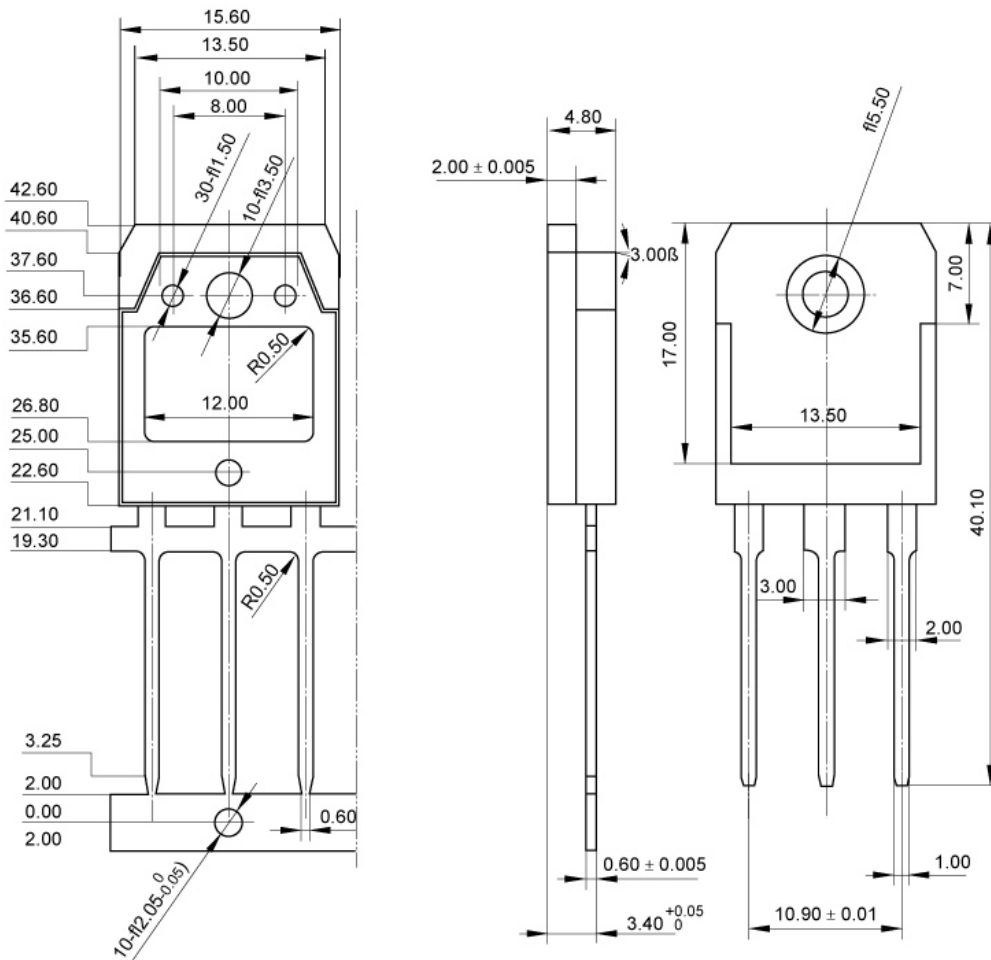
outline dimensions (unindicated tolerance:±0.1mm)
